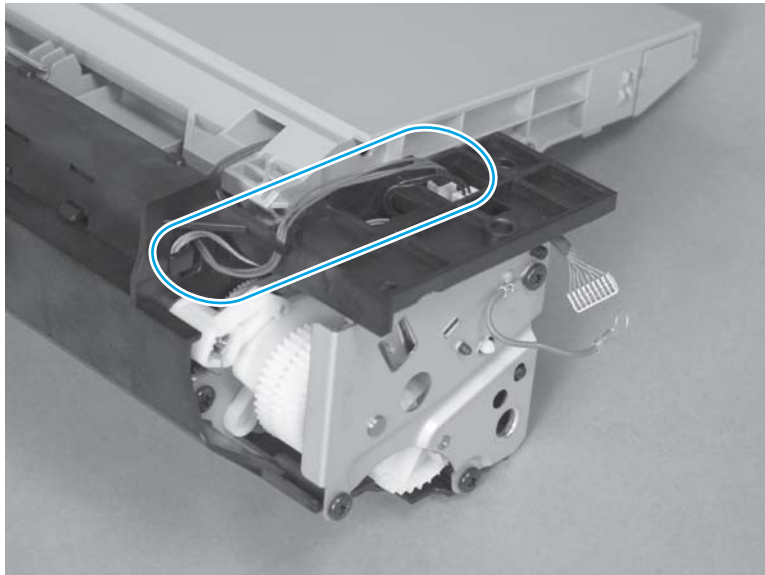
Remove the multipurpose tray (Tray 1) pickup assembly (10 of 10)
